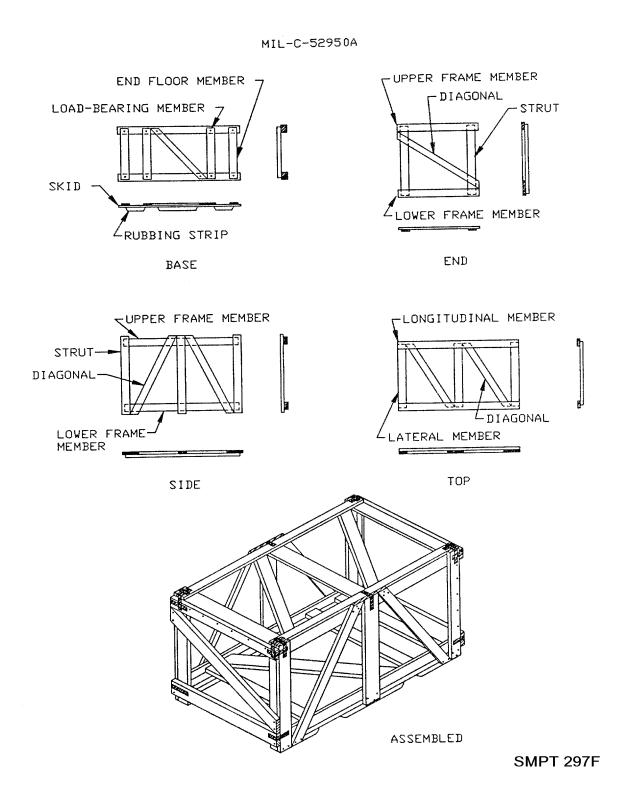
Type IV, style A crate assembly (MIL-C-52950).
